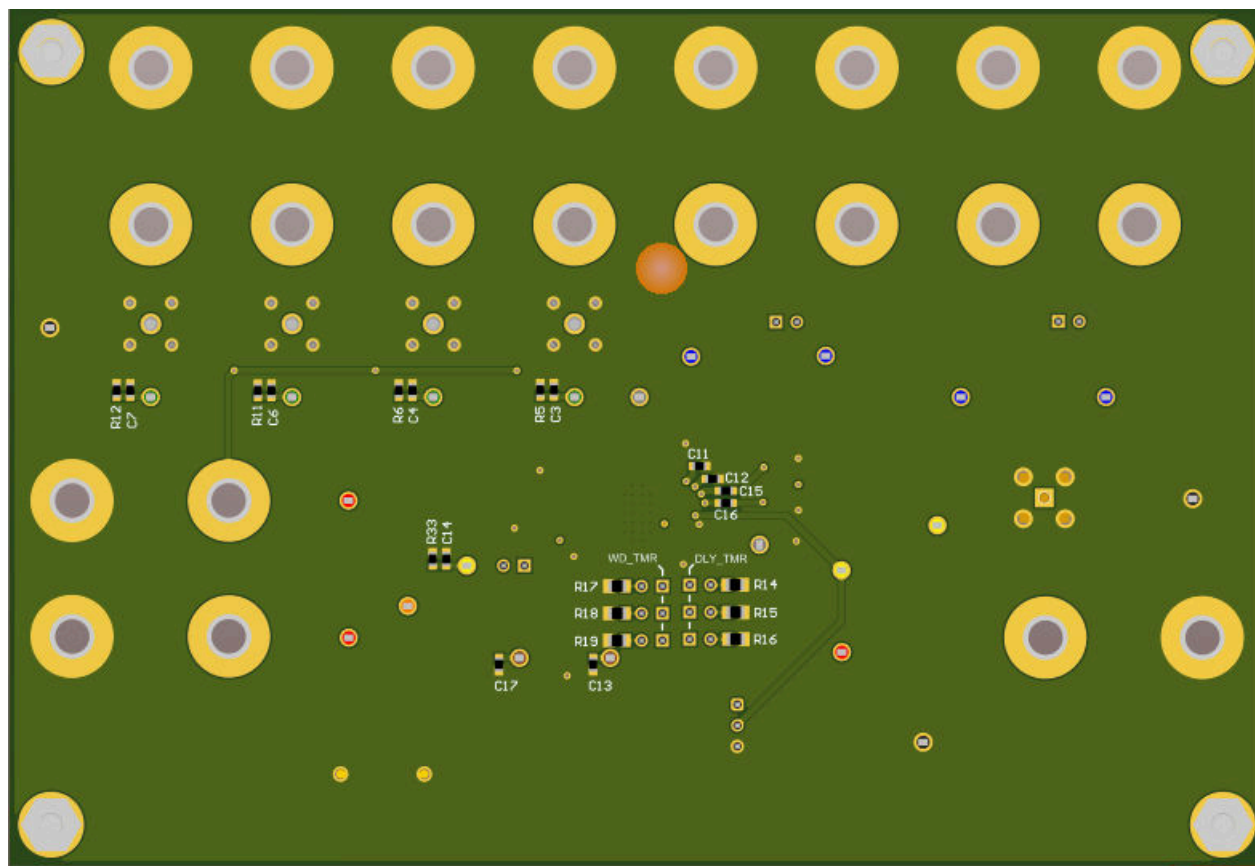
Printed Circuit Board Layout Example: Bottom Layer 3D View
